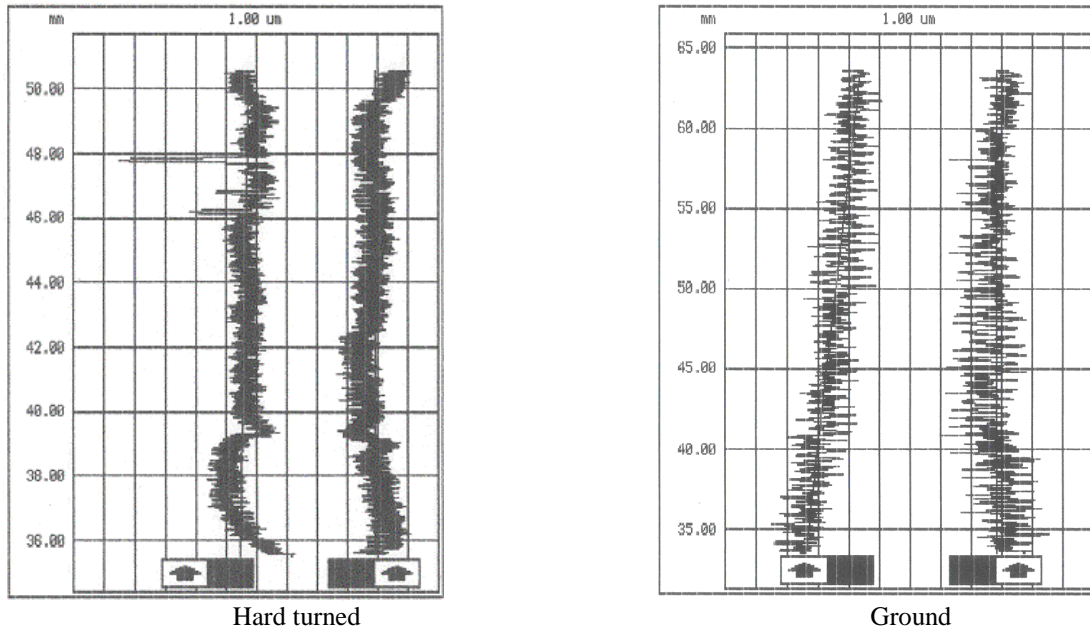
Parallelism profiles of GEAR 1 and GEAR 2 after grinding and hard turning
